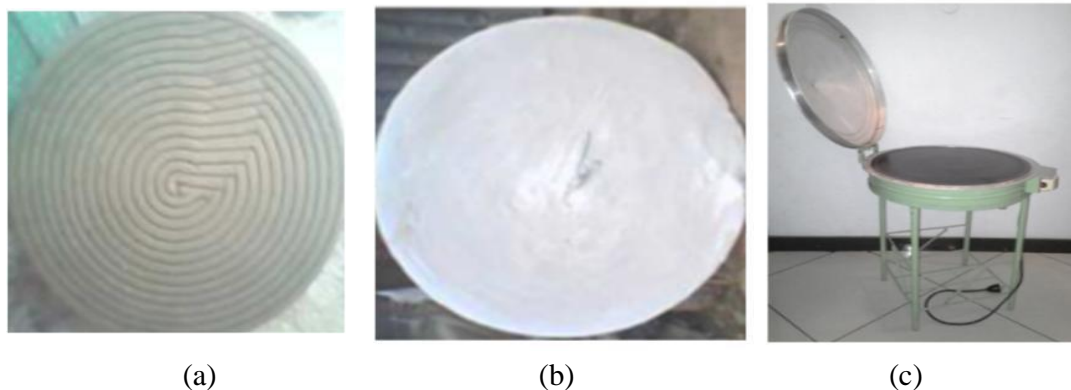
(a) Backside of clay plate with groove, (b) Sealed with gypsum and (c) Assembled electric injera stove [9]
